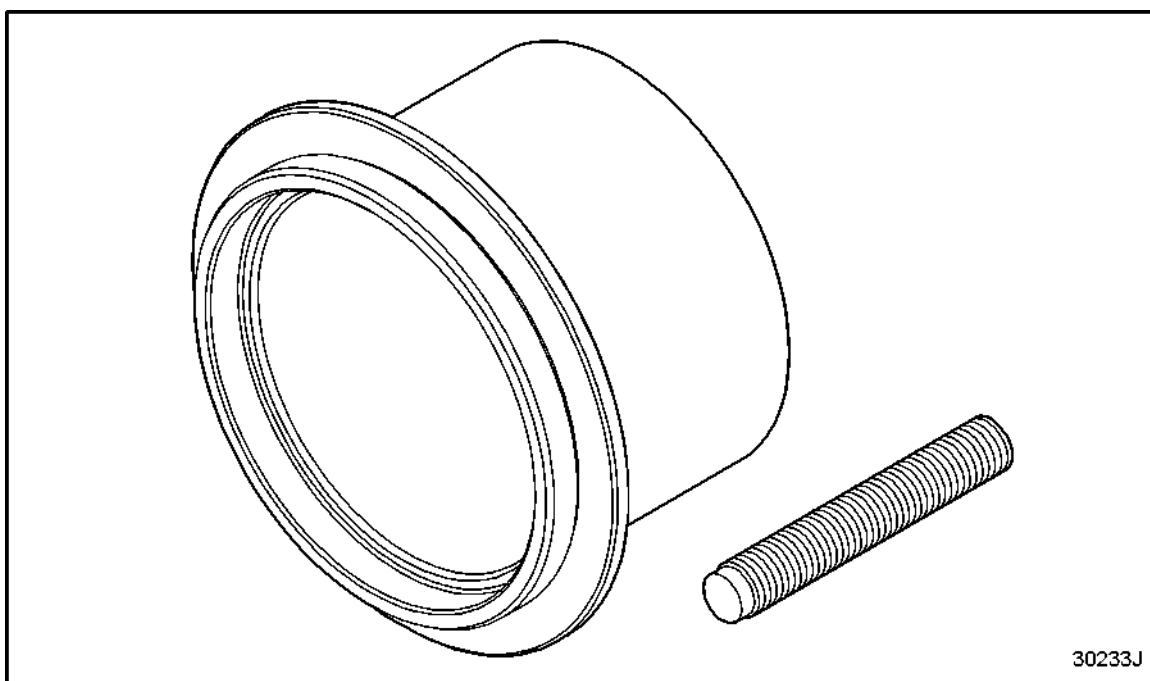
Rear Crankshaft Seal Installer,J 42735
